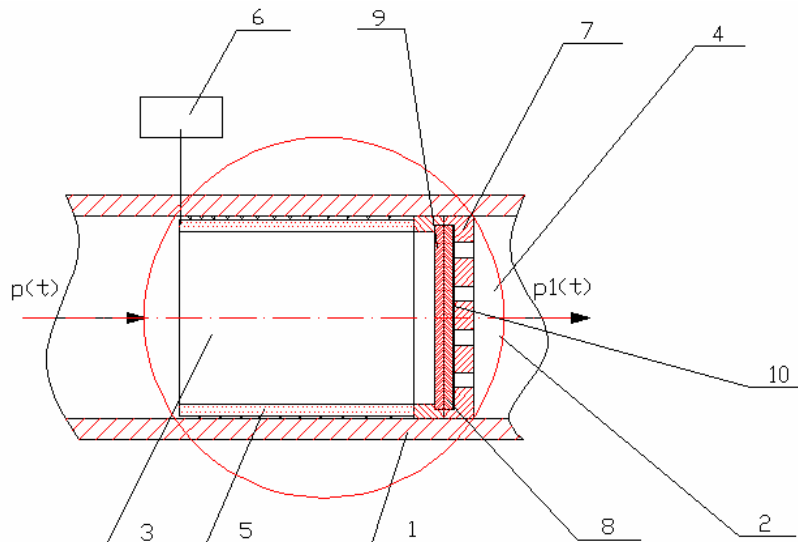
1-cylindrical valve body, 2-control actuator, 3-incoming cavity, 4-output cavity, 5-piezocylinder, 6-power supply, 7-steel disc with holes, 8-motionlessly fixed membrane, 9-control membrane, 10-layer of teflon
